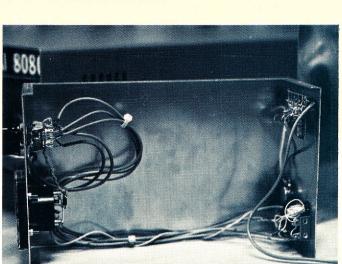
Detail of simple LM 380 amplifier mounting technique for "died in the wool" heat sink fans.
